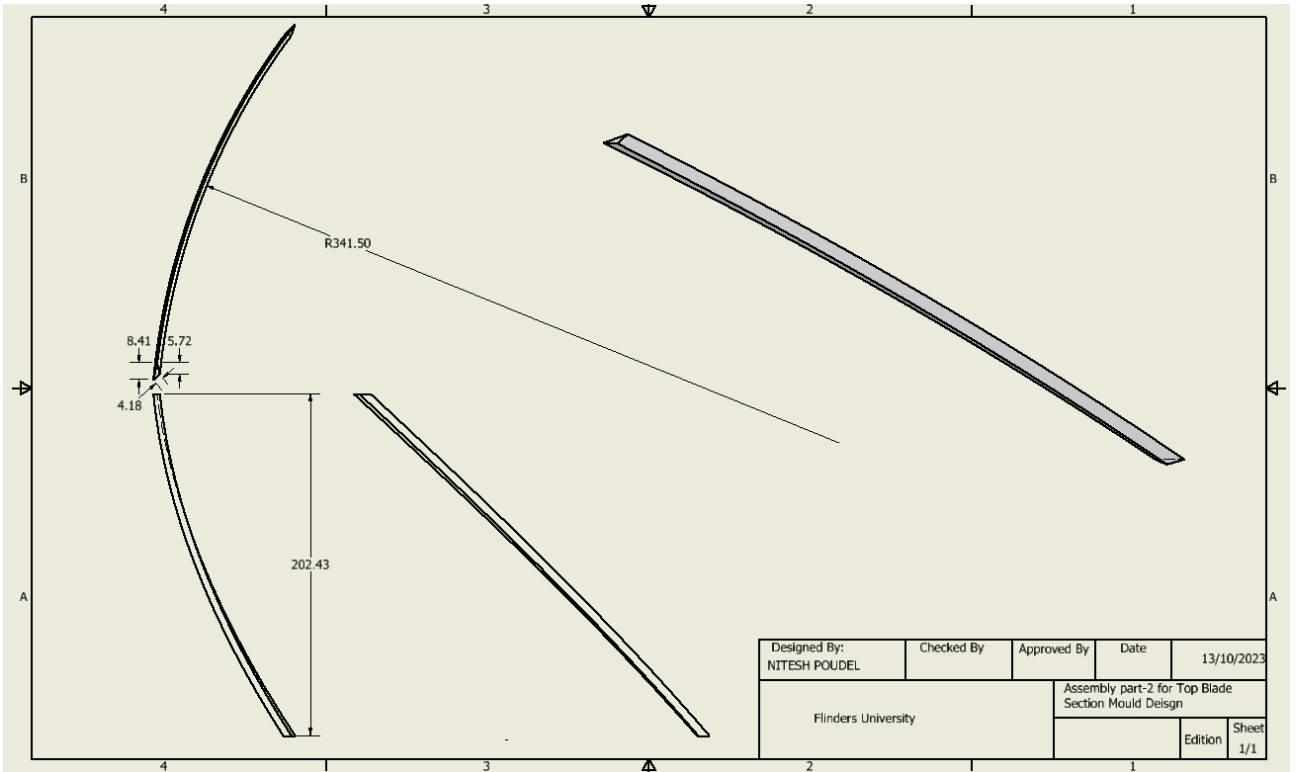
Assembly part-2 for Top Blade Section Mould Design
